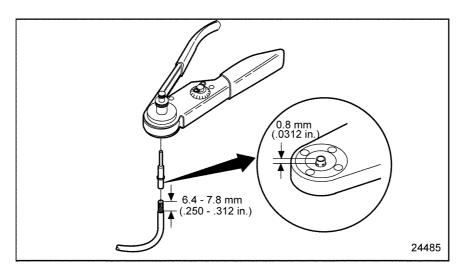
Setting Wire Gage Selector and Positioning the Contact
